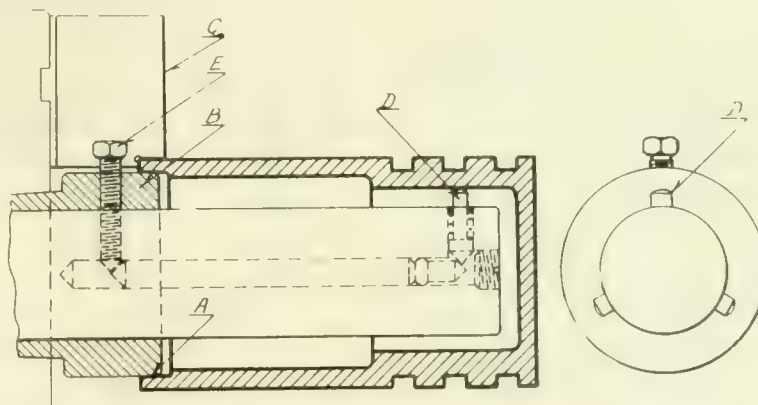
PISTON HOLDER ARRANGED WITH CHUCK AS DRIVER.
